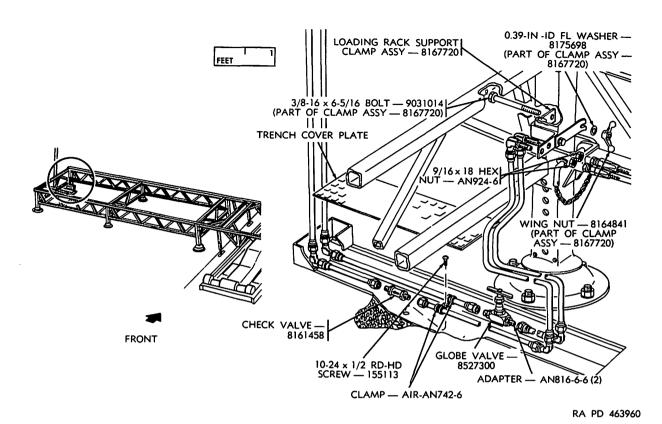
Loading rack support clamp assembly, globe valve, and check valve – left side – removal and installation.
